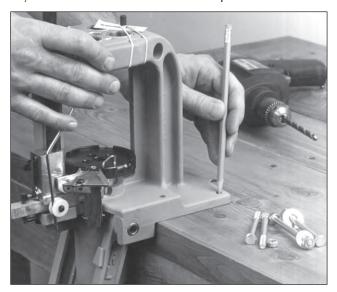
Using the machine as a template, mark and drill four 1/4 inch holes allowing 12 inches on each side for your work area.
